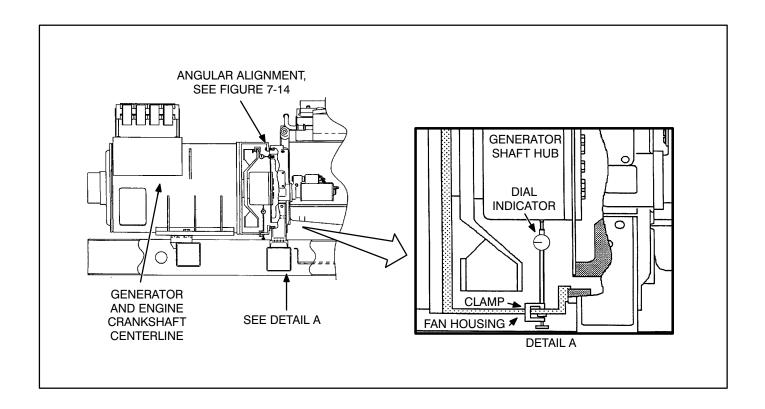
AXIAL ALIGNMENT MEASUREMENT
